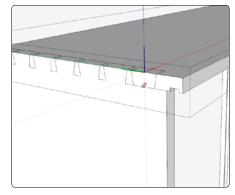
Use the Push/Pull Tool to fill in the dovetail gap.
